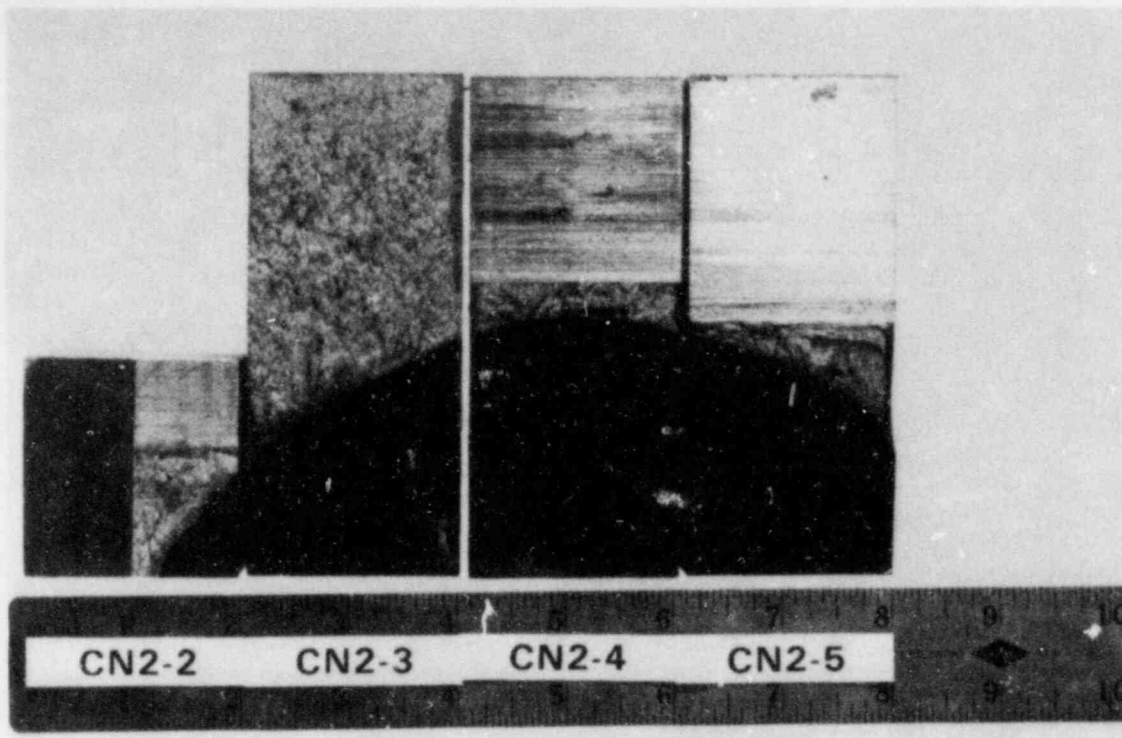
Lower Fracture Surface for Flaw C.
